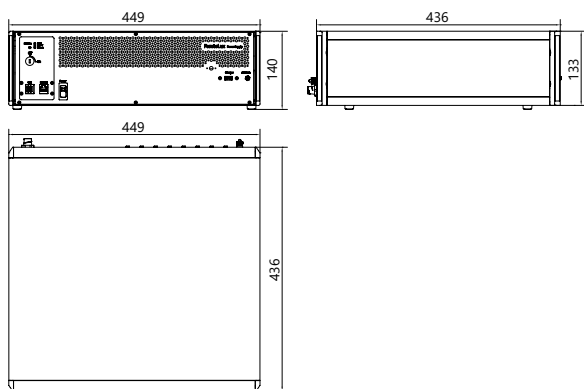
Outline drawing of FemtoLux stand-alone control unit
